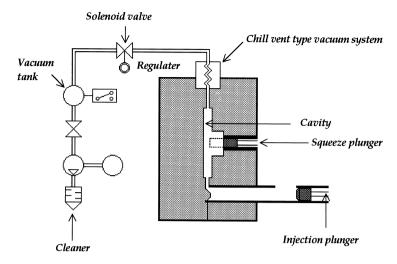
Schematic drawing of the partial squeeze and vacuum die casting machinery.
